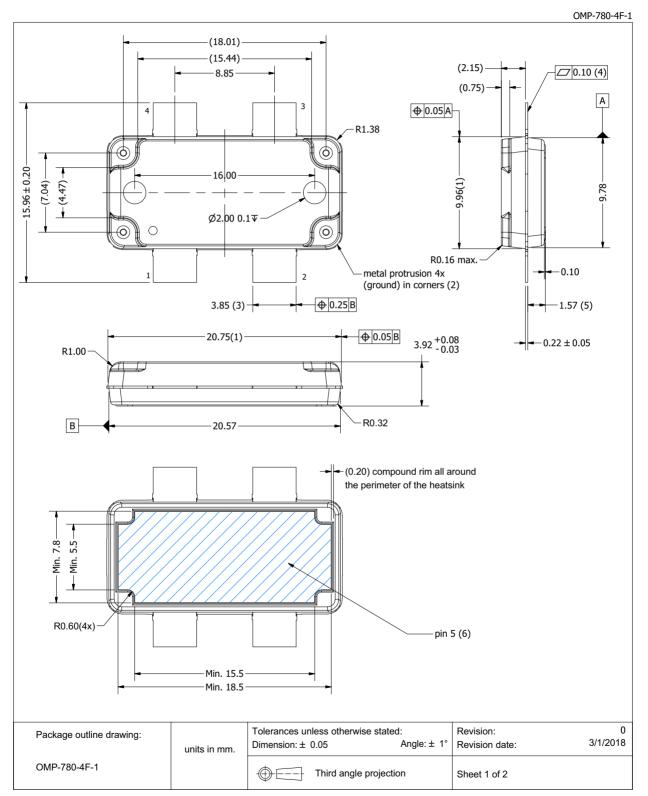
Package outline OMP-780-4F-1 (sheet 1 of 2)
